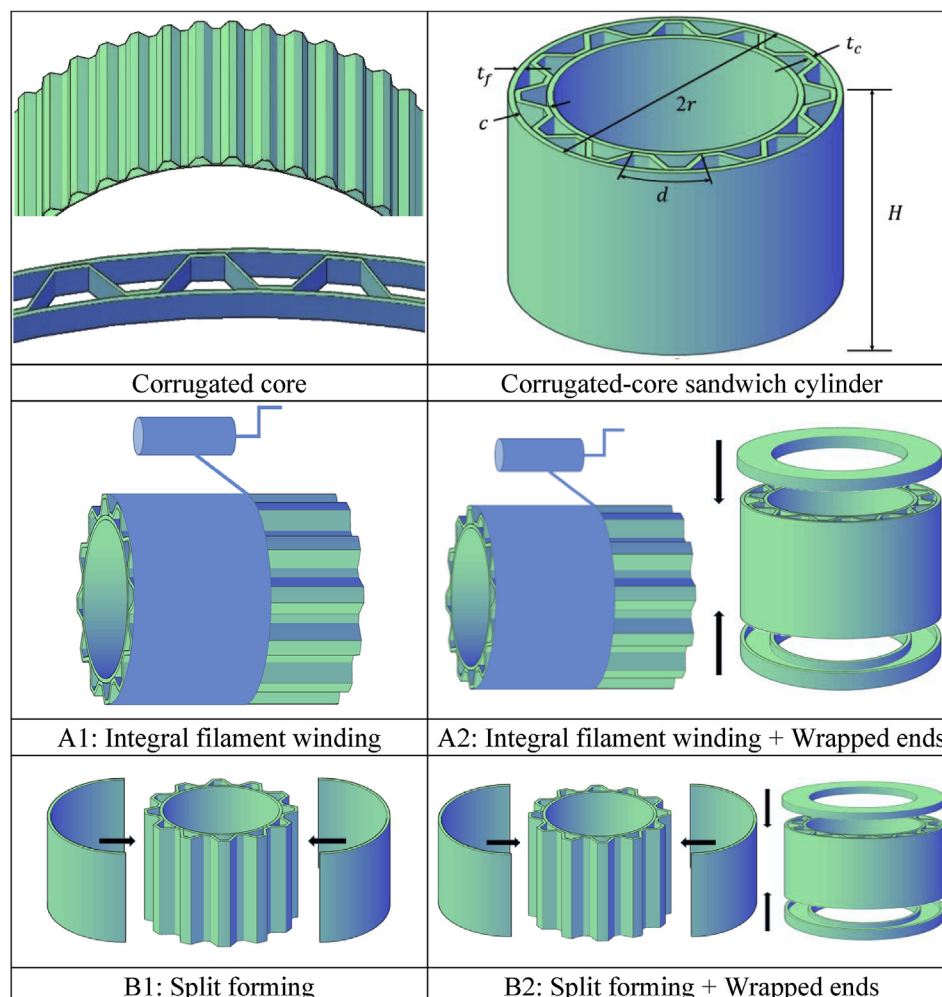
Corrugated-core sandwich cylinder and construction measurements.
